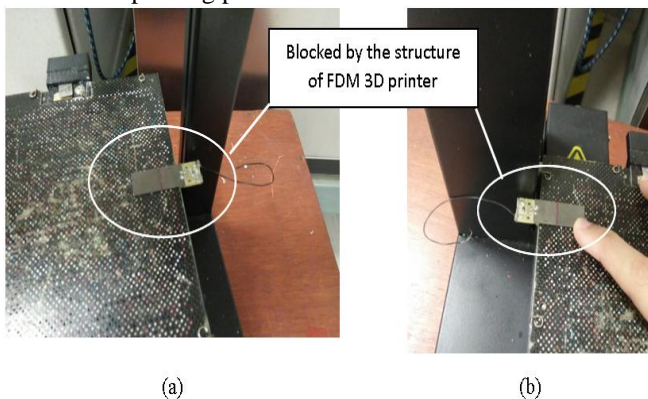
Transducer at struck the structure of FDM 3D printer if mounted the left and right side of the platform (a) Transducer placed at the right side (b) Transducer placed at the left side
